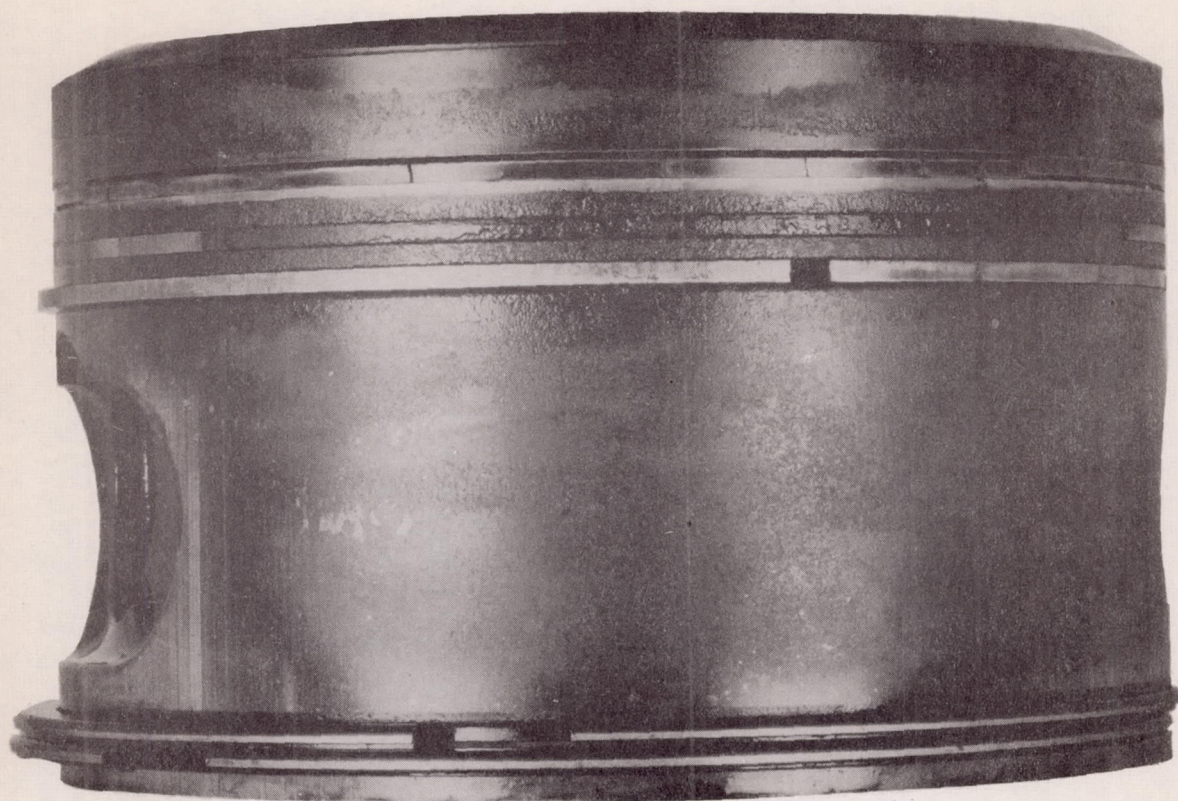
Piston and ring assembly just before the first endurance test. Failure of top and second rings has taken place.
